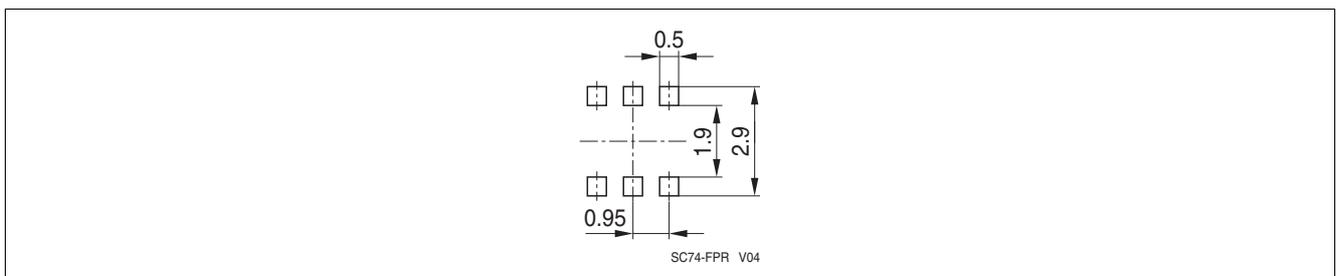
Package Footprint for SC74 (dimensions in mm)
